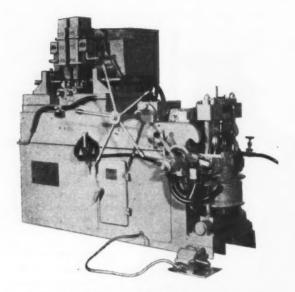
Semi-automatic flash butt welding machine (A. I. Electric Welding Machines, Ltd.)
